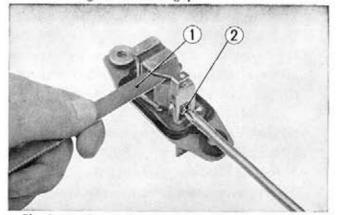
(1) Thickness gauge ② Core gap adjusting screw
